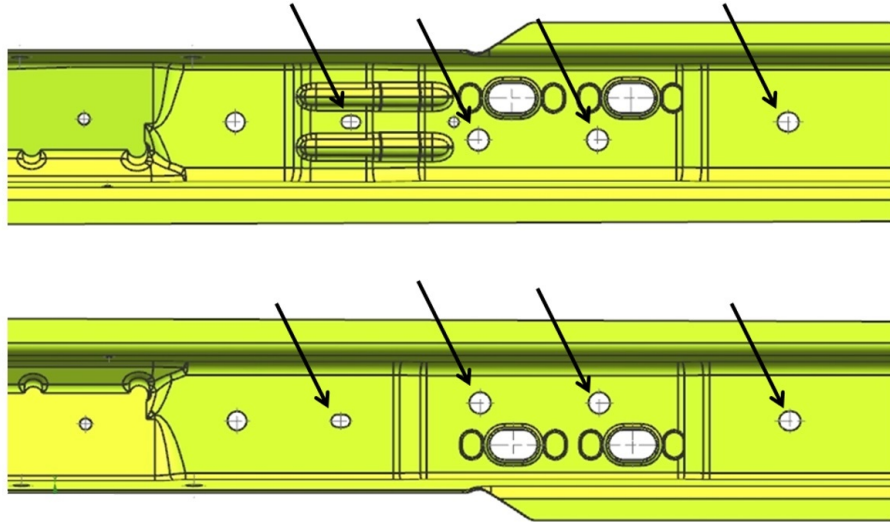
Bolt holes to be used by the ESS mounting bolts.
